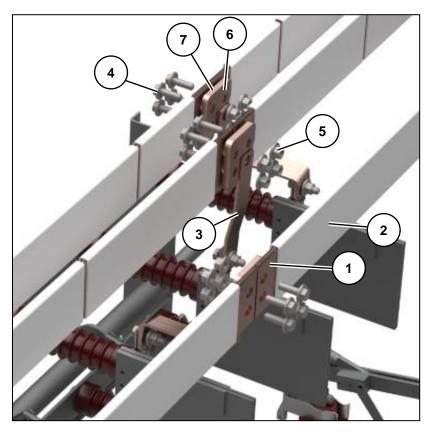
Assembly of 1250 A busbar, feeder 1250A
